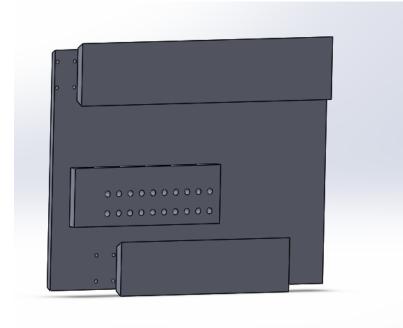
The two dovetails are easily machined barrel due to single fixturing. (Roni Ampuja 2021)
